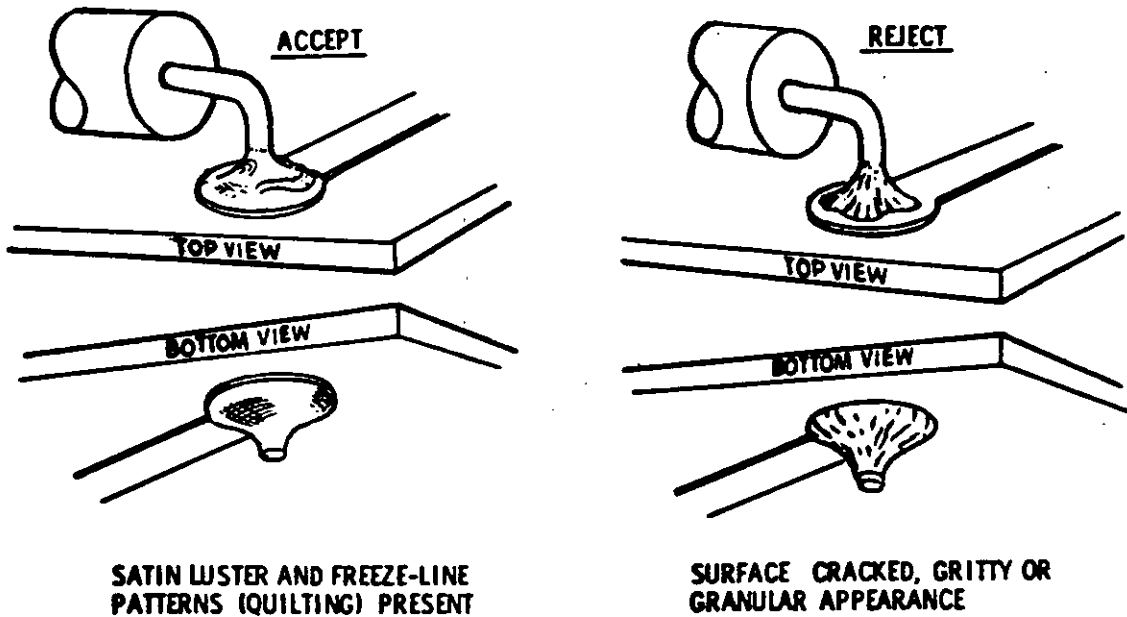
Plated-thru holes - solder surface characteristics.
